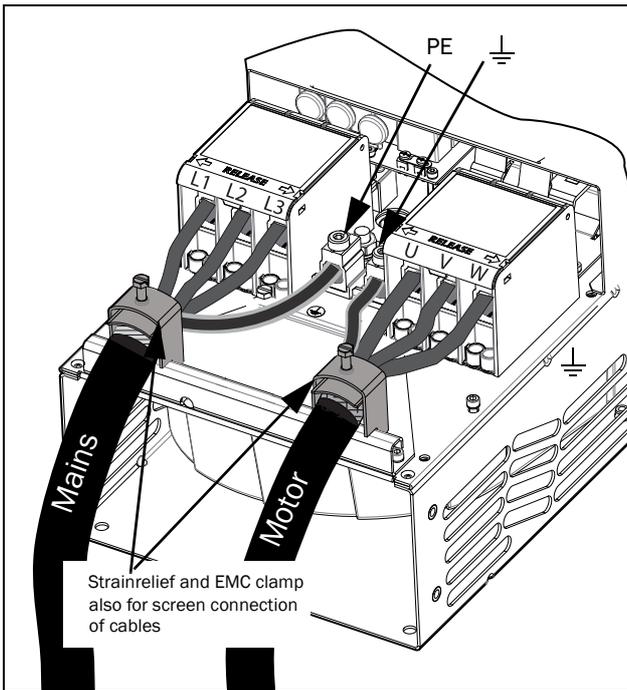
Mains and motor connections model 48-142 to 48-293 (Size E2 and F2) (principle drawing).
